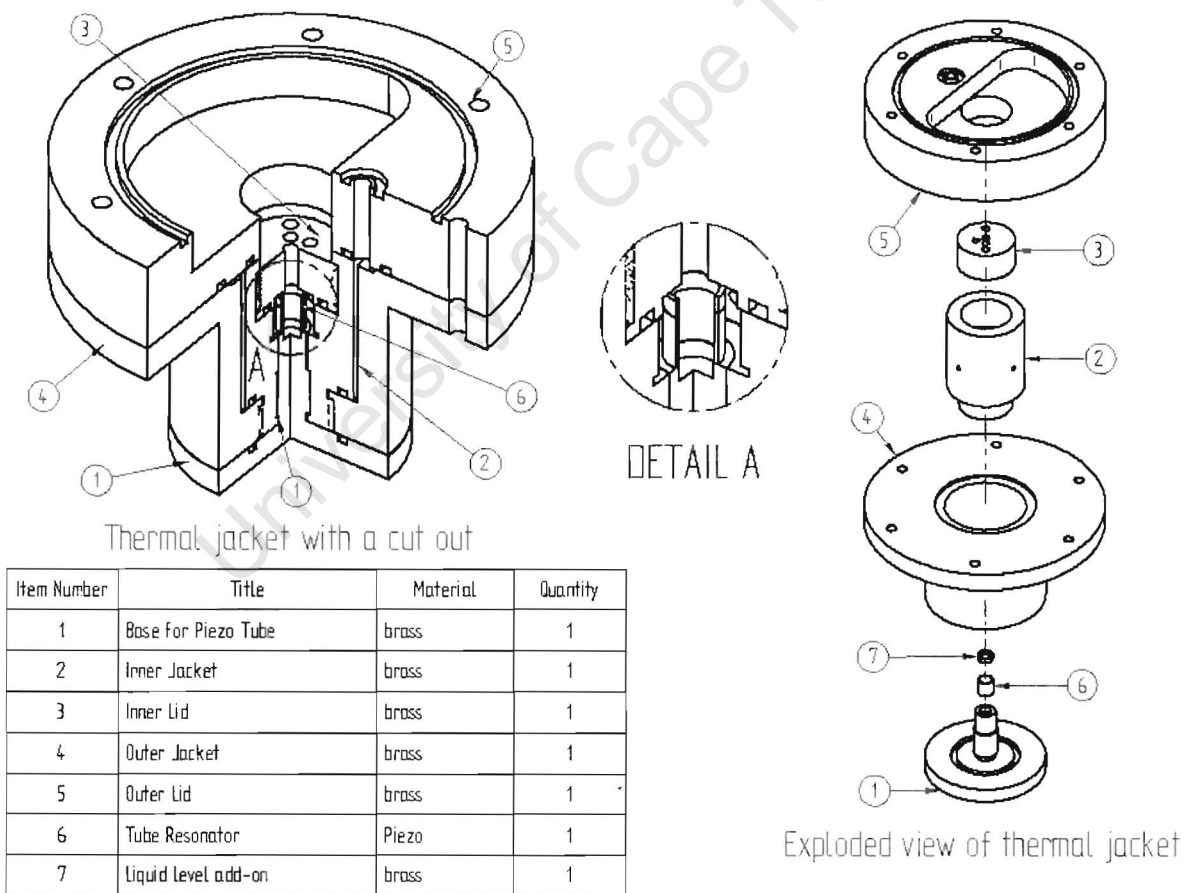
Exploded and cutaway view of the interferometer. The Drawing also contains a table labelling all the parts
